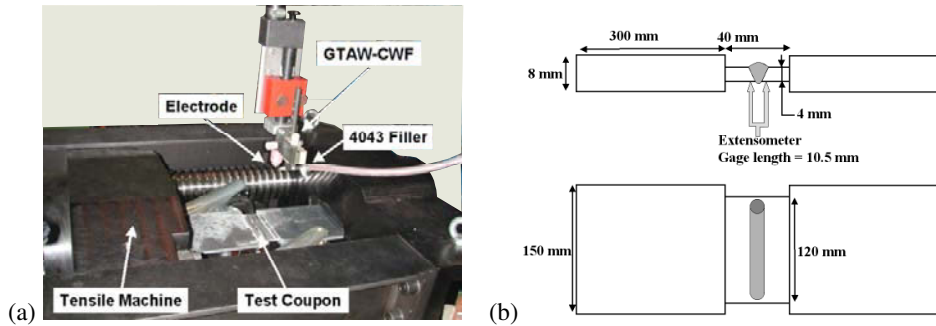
(a) Overview of CTW test machine and (b) dimensions of test coupon showing test coupon joined to two load-transfer plates.
